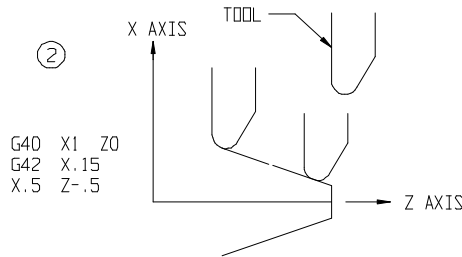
shows a problem on the G42 X.15 block. The desired position at the face of the part is not obtained.
